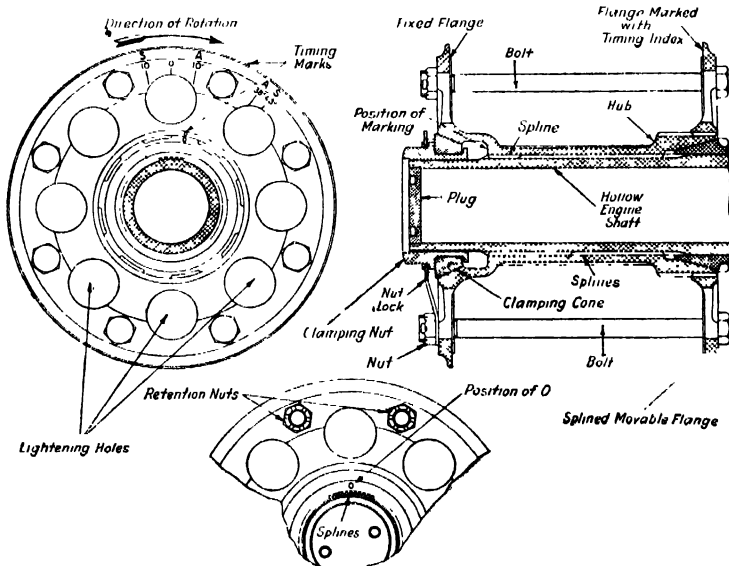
Propeller Hub Construction Used on Fiat Aero Engines is a Simple, Strong Type and Has Timing Index Marks on One of the Flanges.
